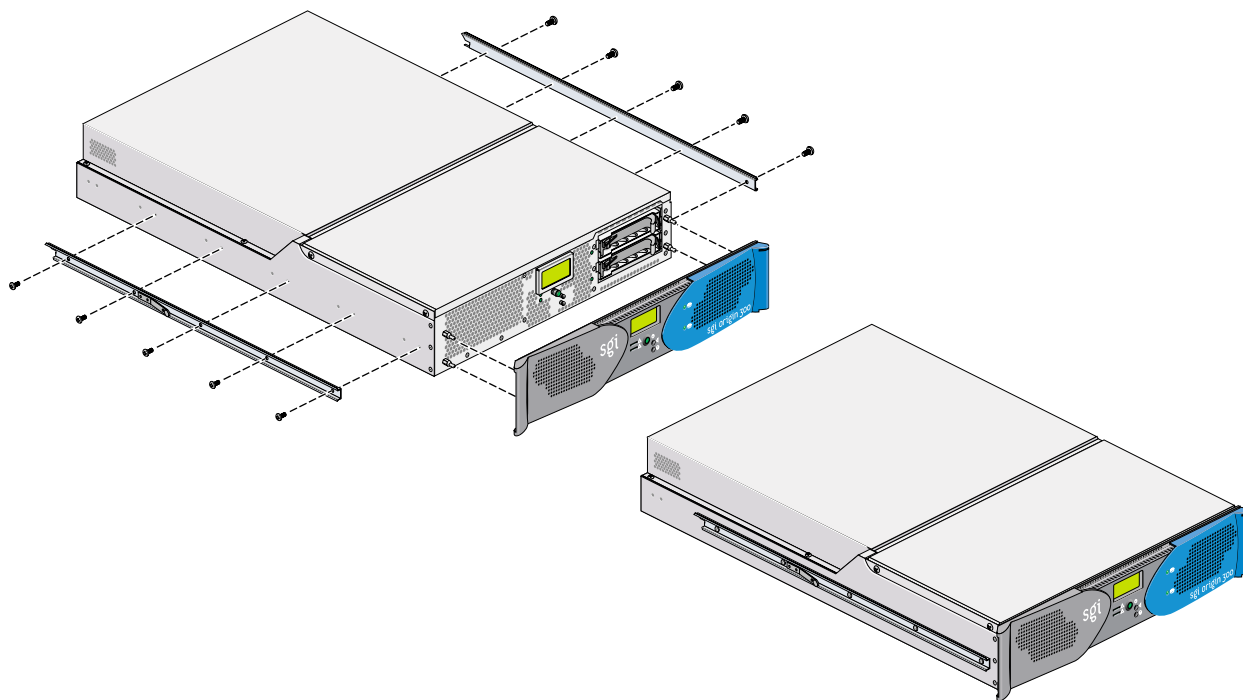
Attaching Chassis Rails to the Server Chassis
